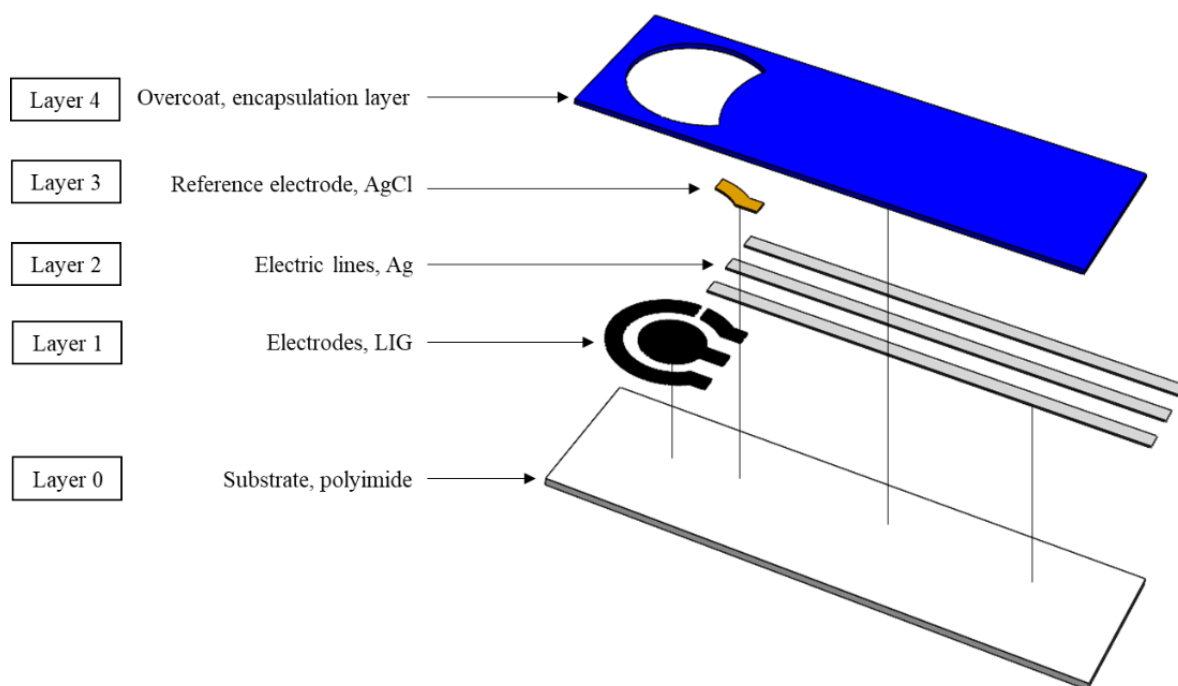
The exploded views of the LIG-SPE design by layers where the working electrode and counter electrode (Layer 1) of the screen-printed electrode were made using LIG fabrication
